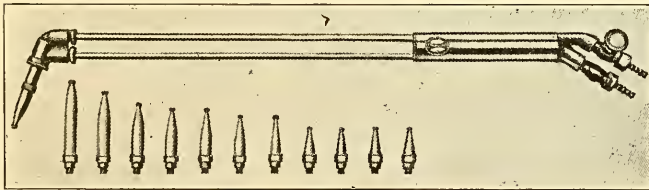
A Thermalene Welding Torch and Tips.
